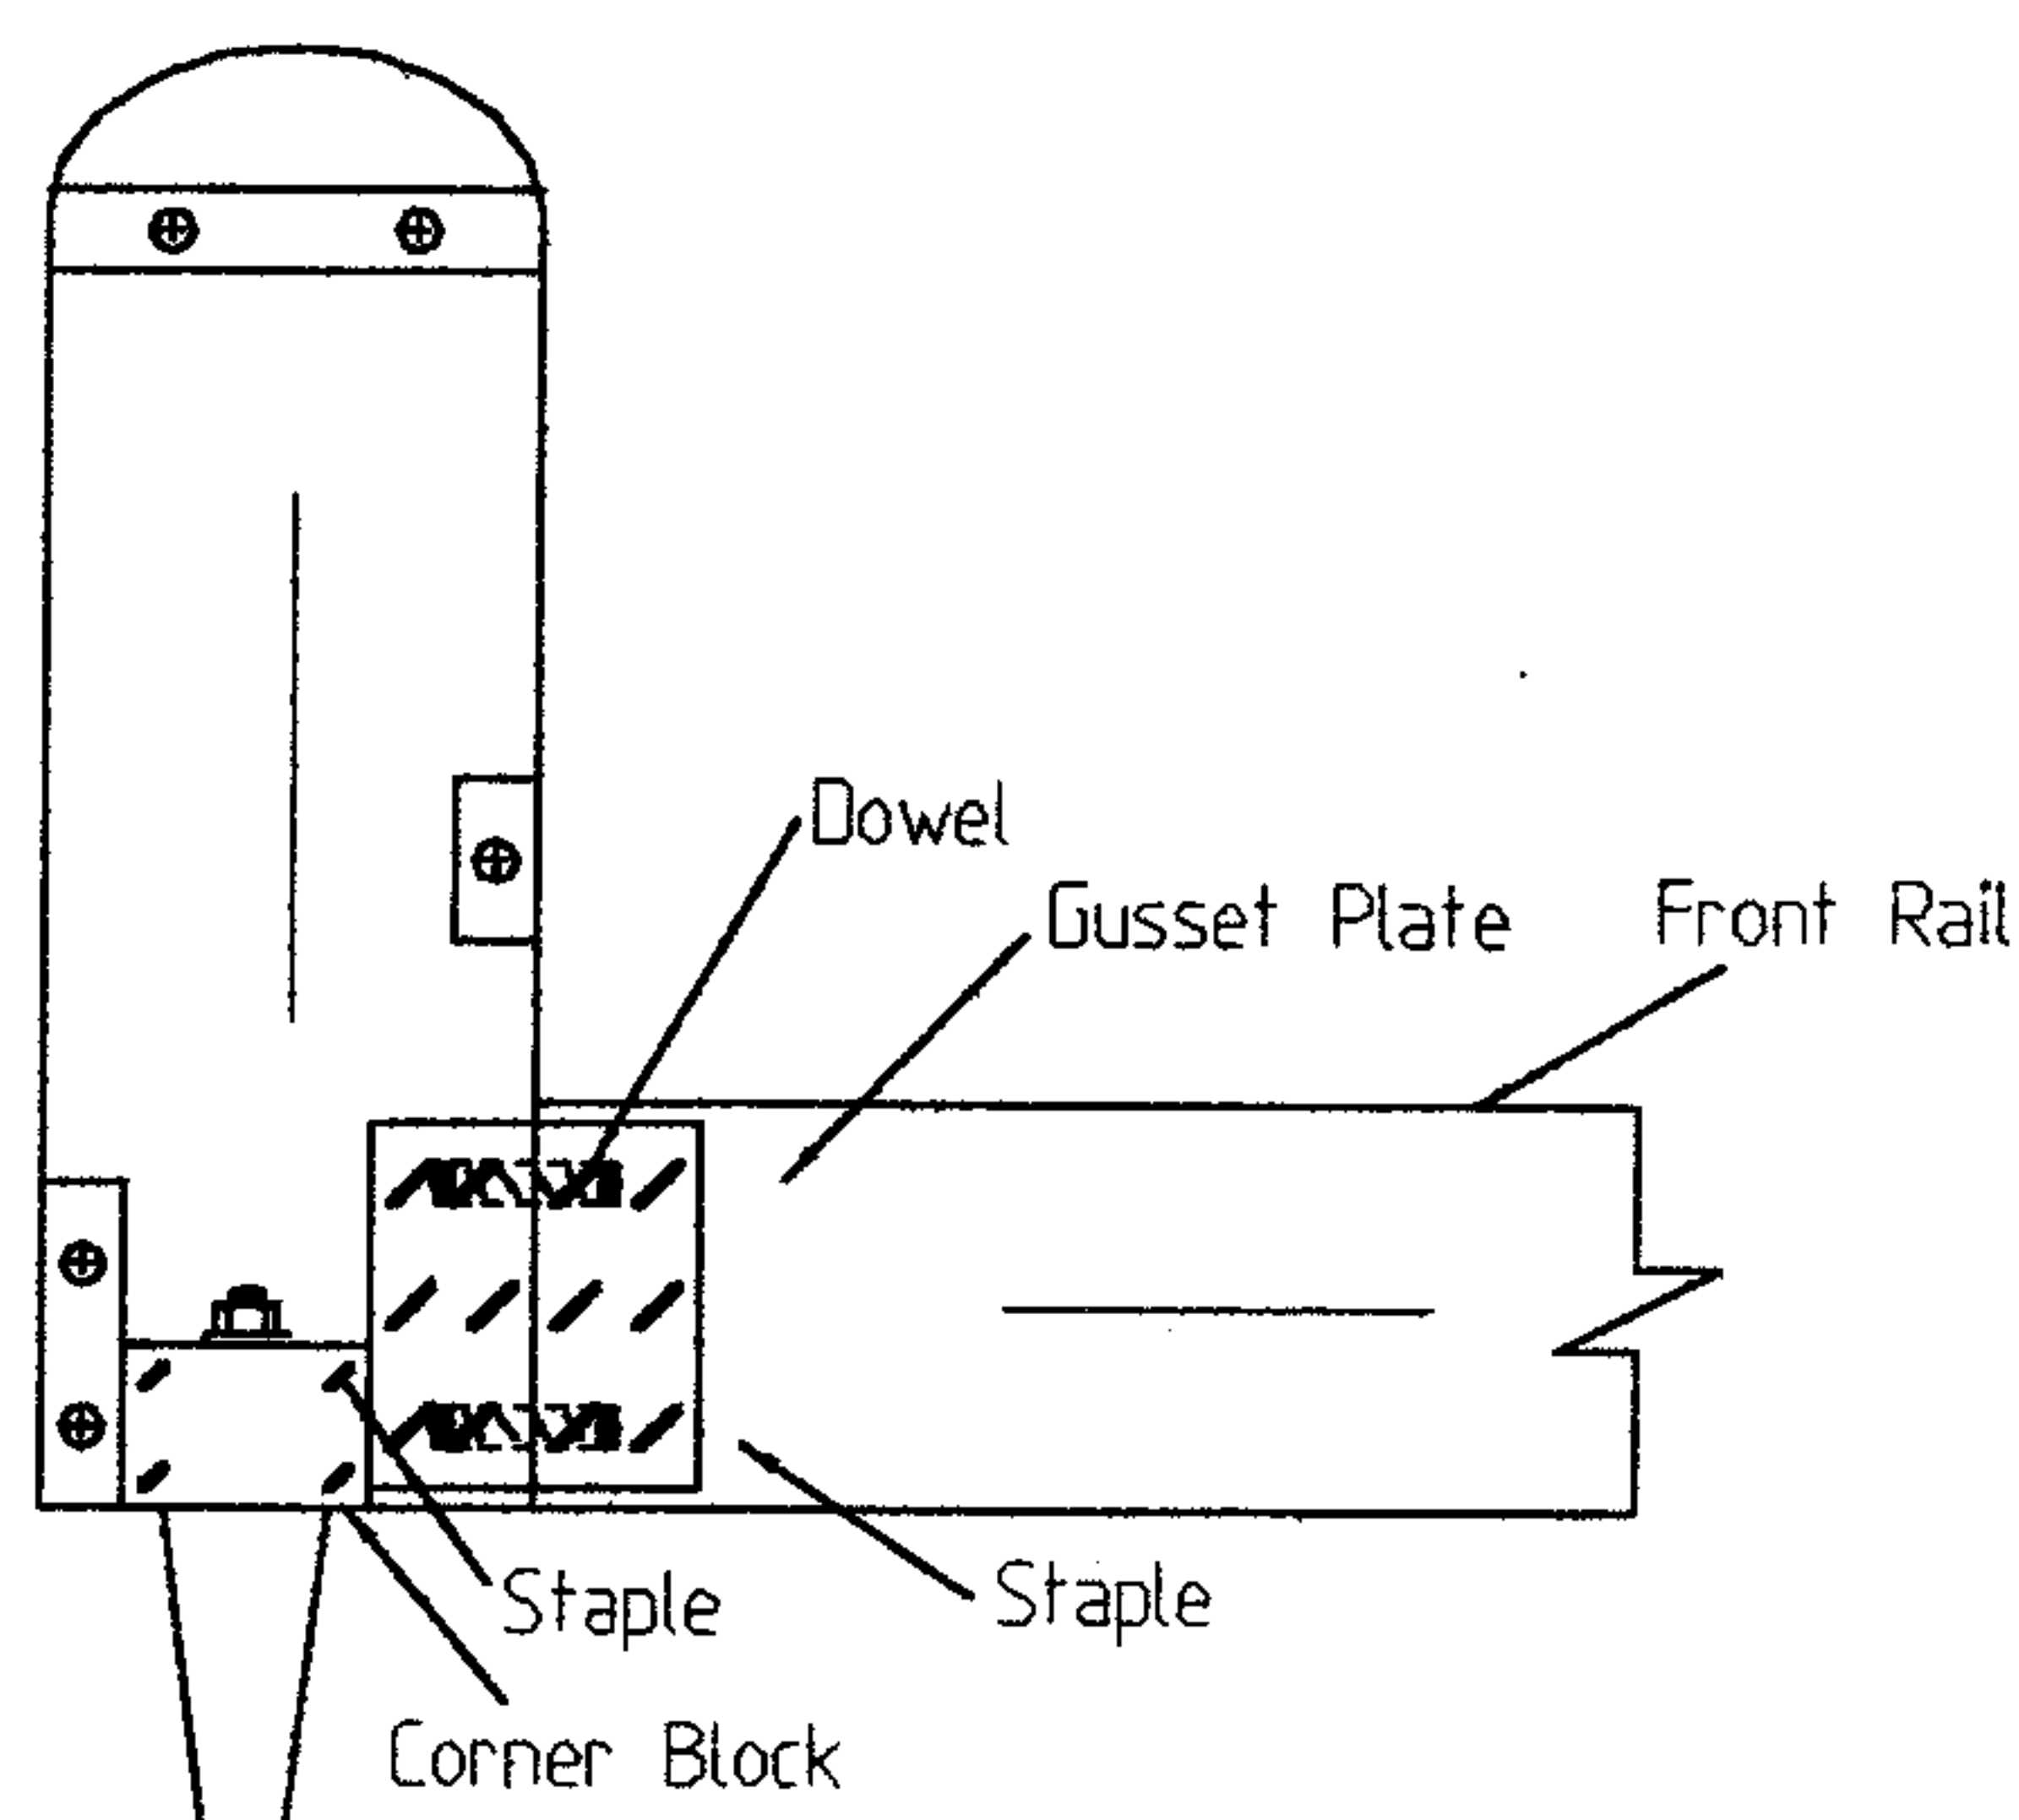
Use of plywood gusset to reinforce front rail to stump joint. Back side of construction is shown.
